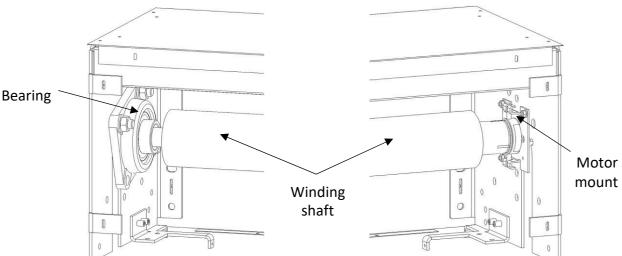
Installation of the winding shaft with the door width > 4000 mm
